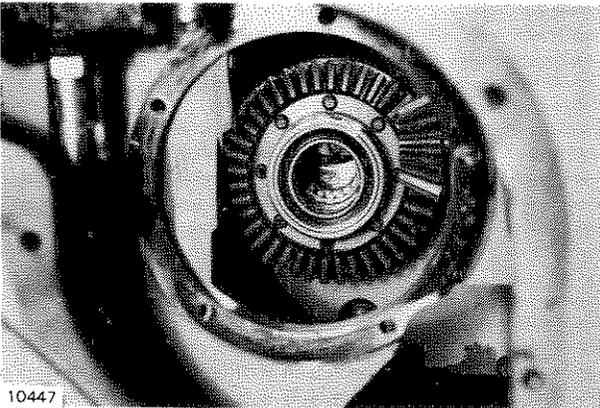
REMOVAL OF THE BRAKE, CLUTCHES AND SHAFT (Page 2 of 3)
